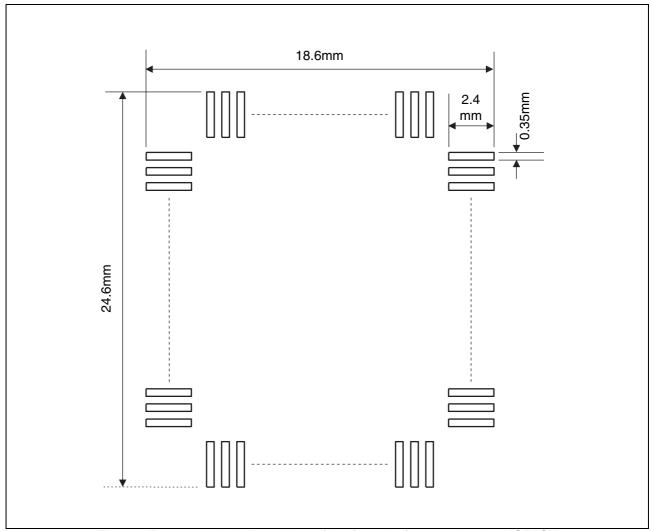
Recommended dimensions of the footprint for mounting the NQPACK
